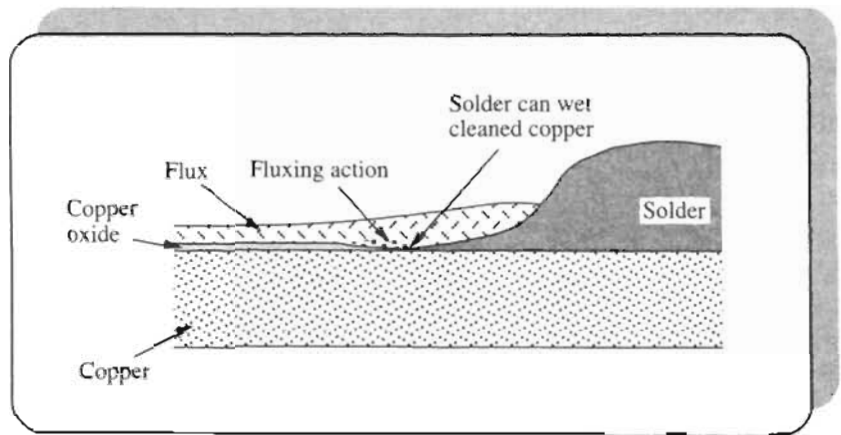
Close-up view of the wetting action of solder on a copper surface, aided by flux
